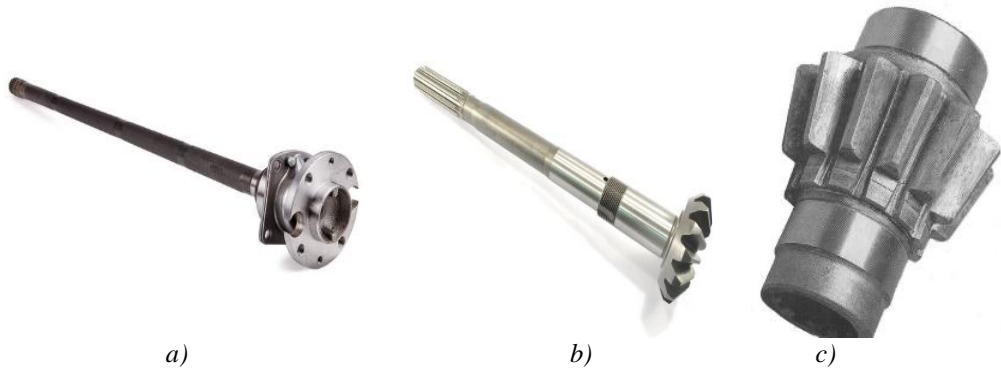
Types of controlled spare parts: a) half-axle; b) shaft; c) gear.
